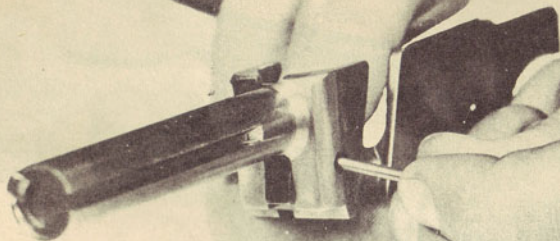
Hold the bolt as shown, (with the thumb applying pressure to the back of the HAMMER) in order that the FIRING PIN and SPRING will not spring away, and drift out the HAMMER PIN (from either side.) Remove FIRING PIN and SPRING.
